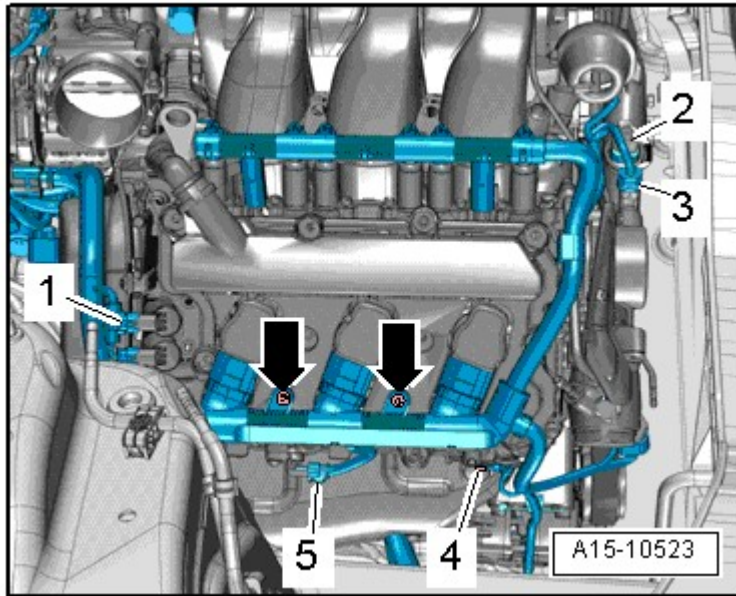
Disconnecting Electrical Connector On Camshaft Position
